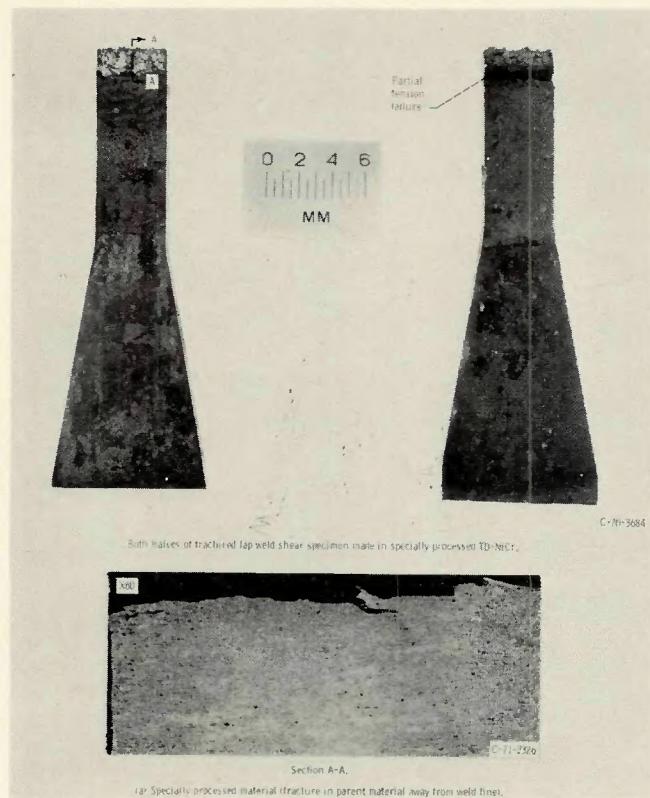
Typical weld tensile-shear specimen fractures of 1.6-millimeter (0.060-in.) TD-NiCr. Planar and cross-sectional views. Etchant, 100 milliliters H_2O , 2 grams CrO_3 and 10 milliliters H_2SO_4 (electrolytic, 3 V dc)
